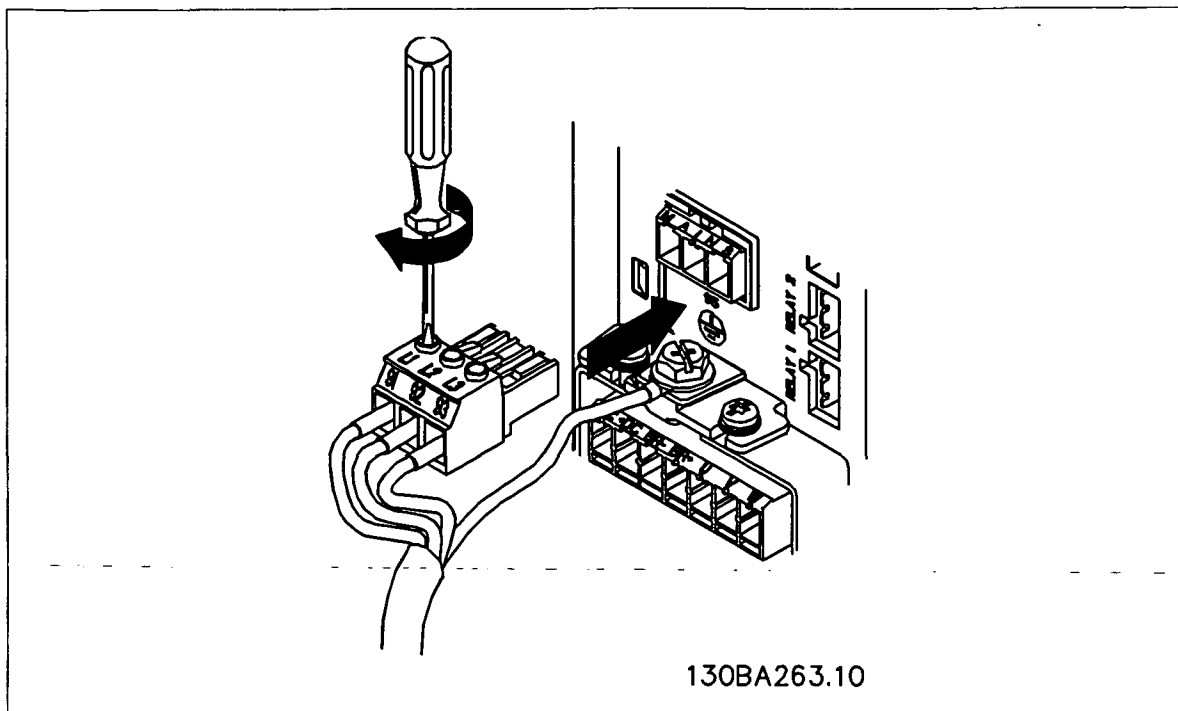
When mounting cables, first mount and tighten earth cable.
